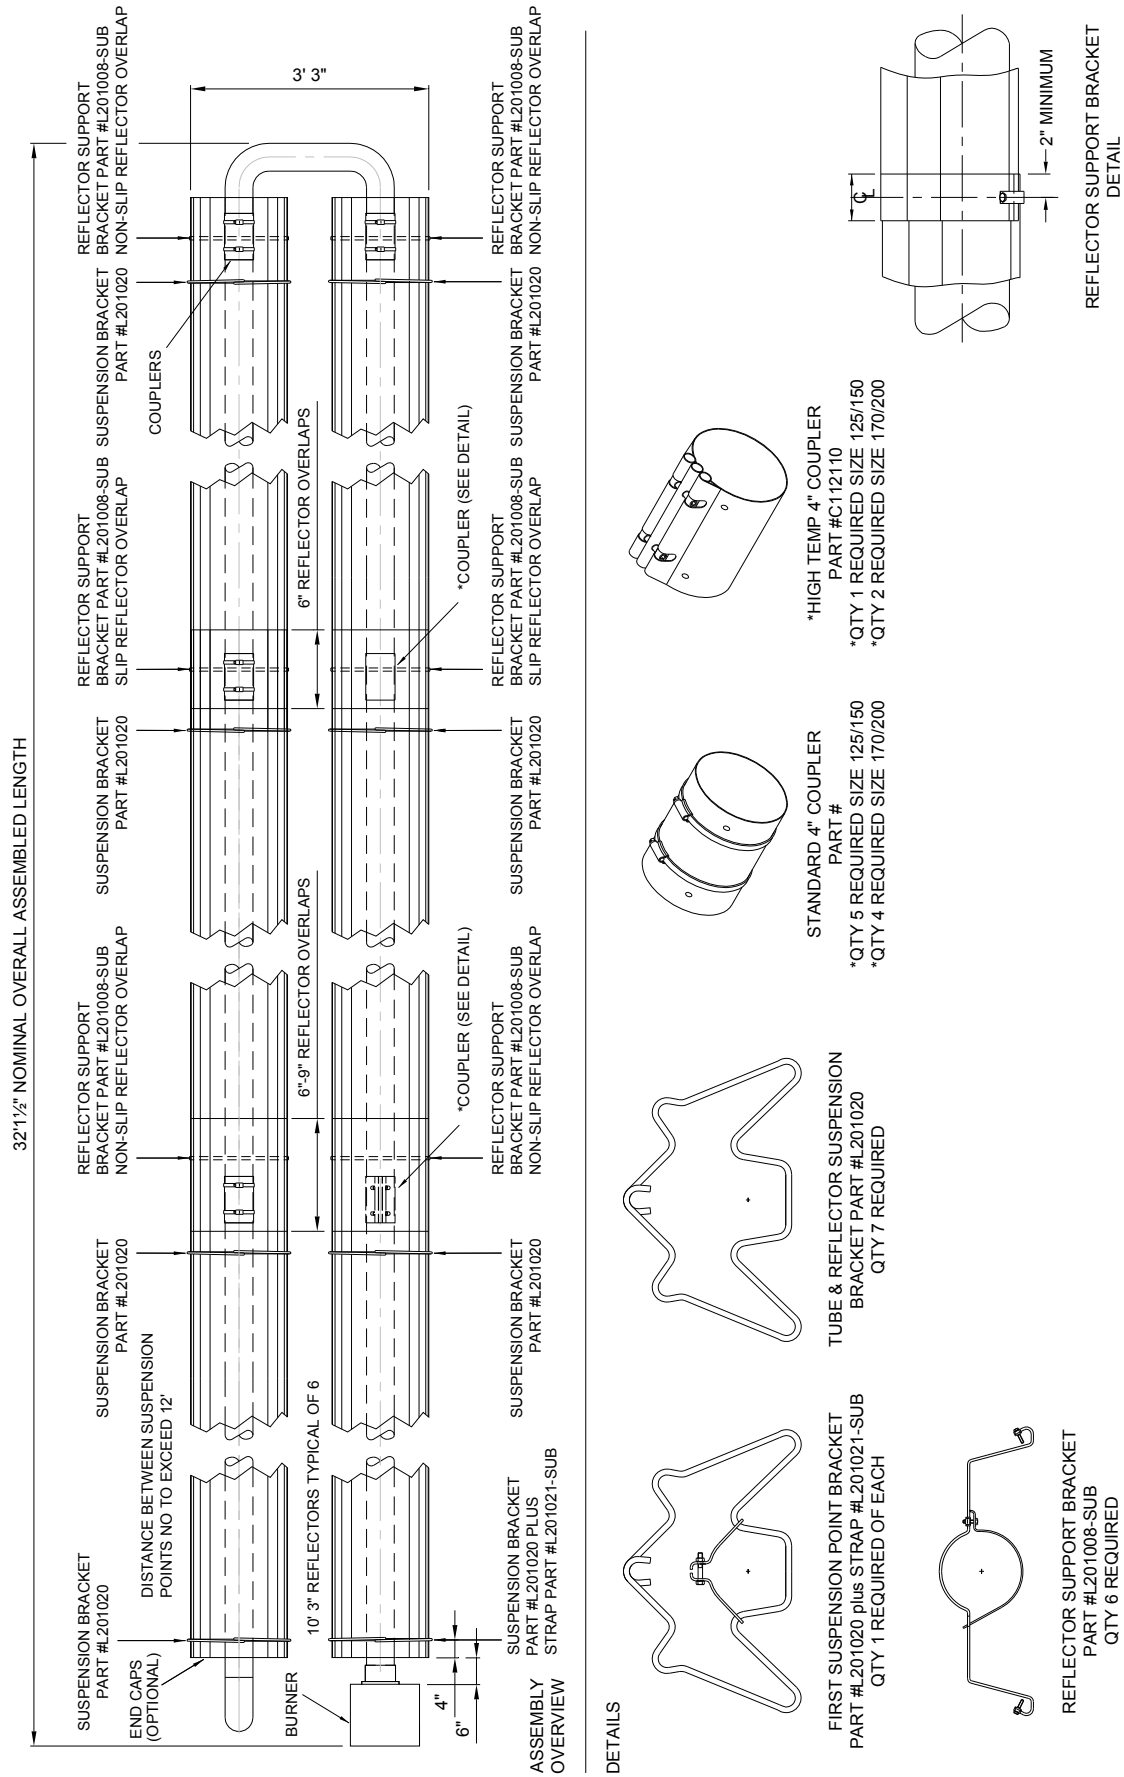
Heater Assembly: Model U tube 150-U60, 170-U60 and 200-U60.
